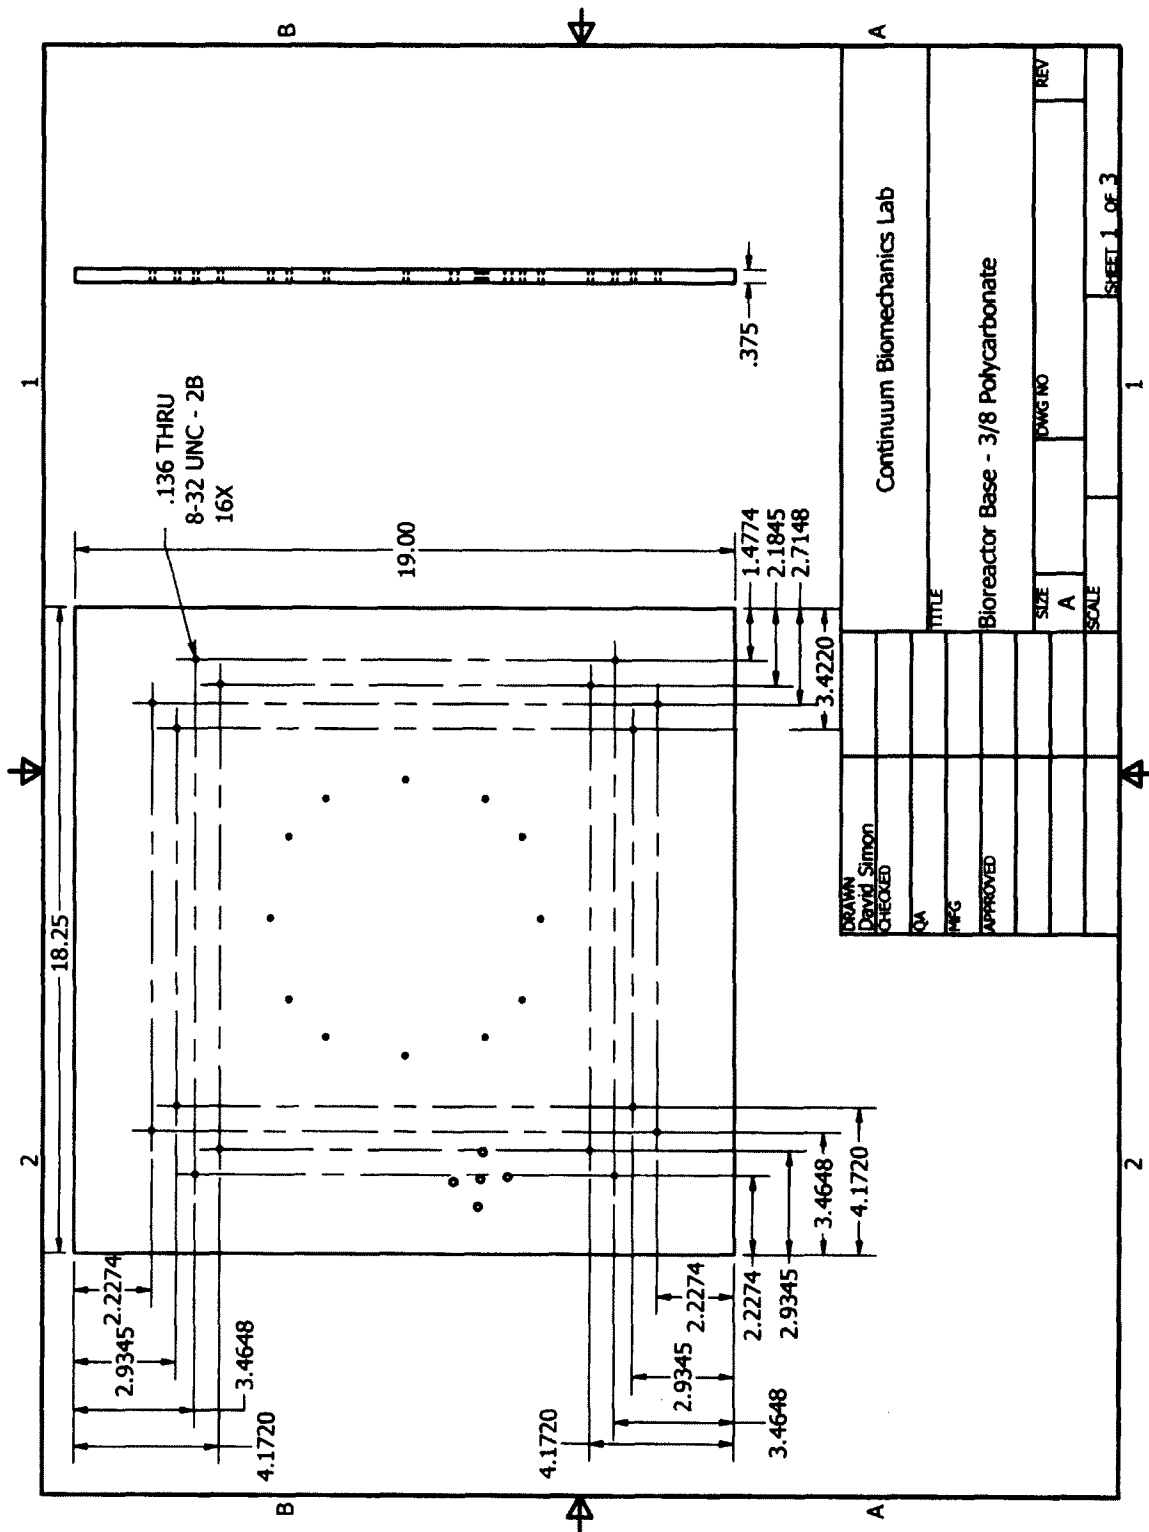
System baseplate technical drawing #1. Provides overall dimensions of baseplate and tapping locations for linear screw motor mounts. Units are in inches.
